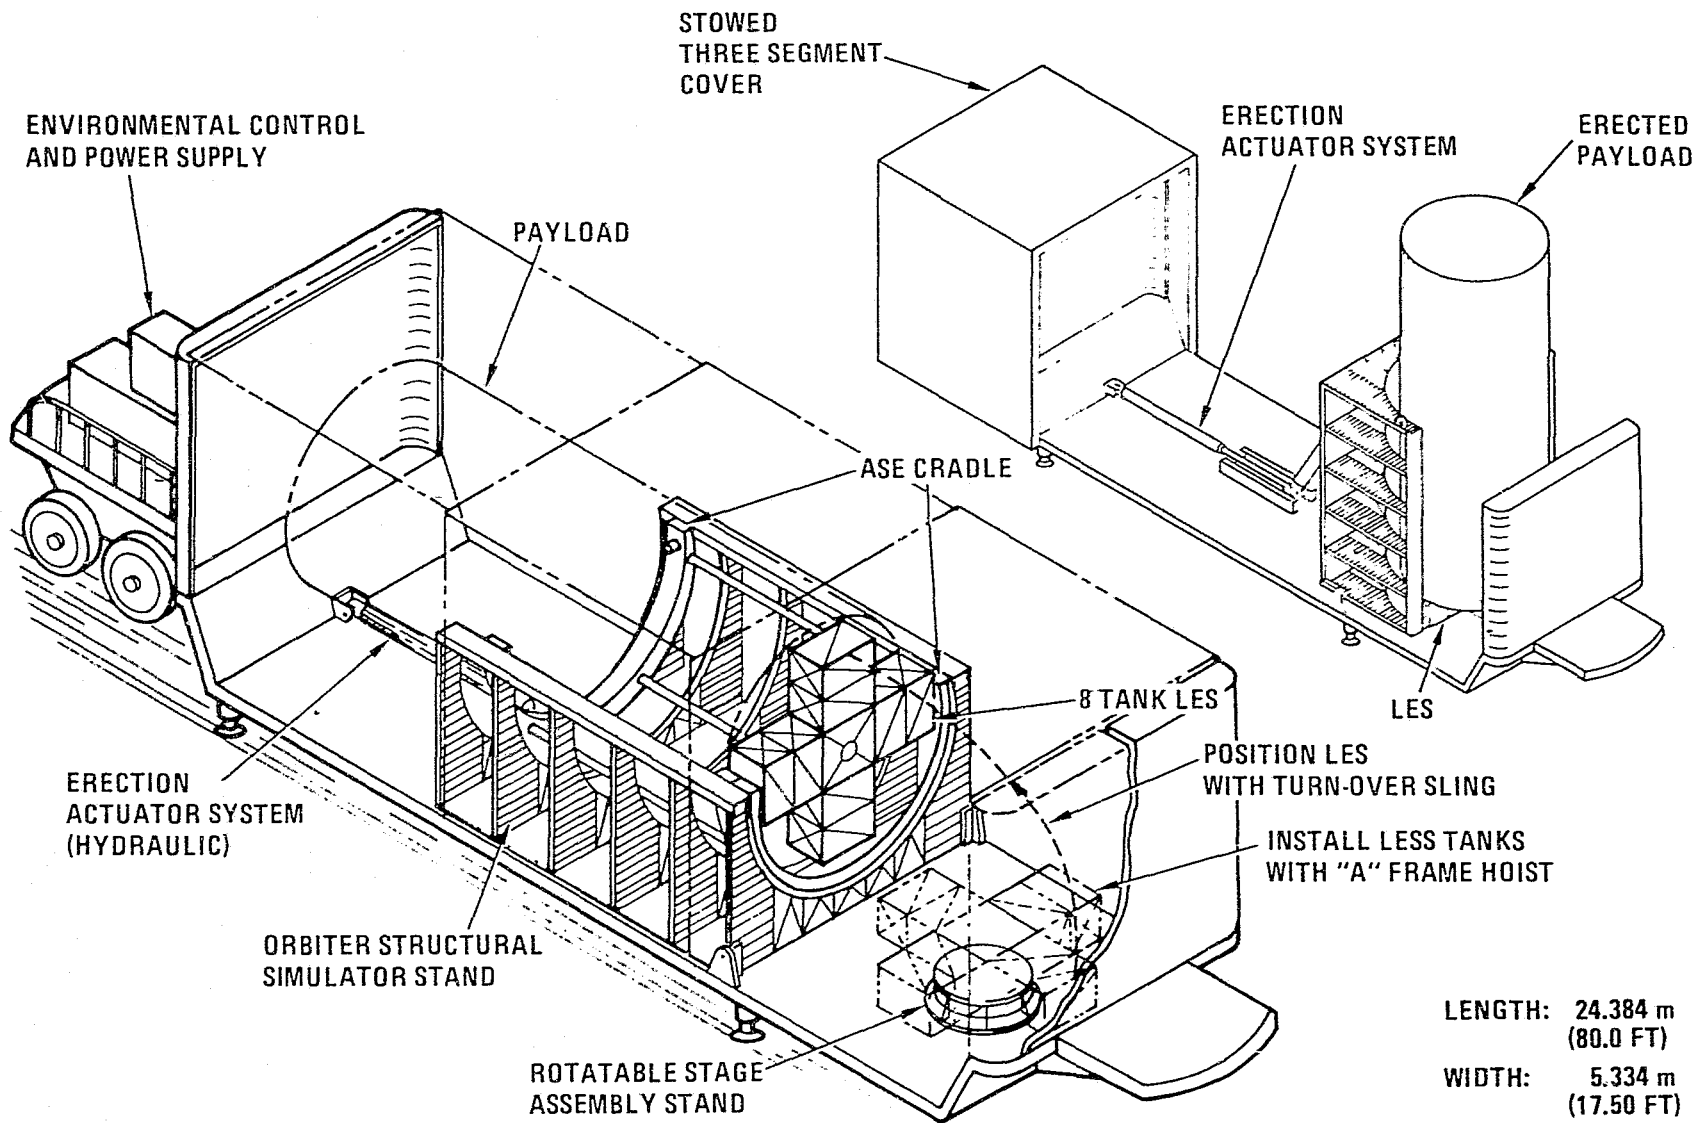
MOBILE FLAT BED ASSEMBLY
